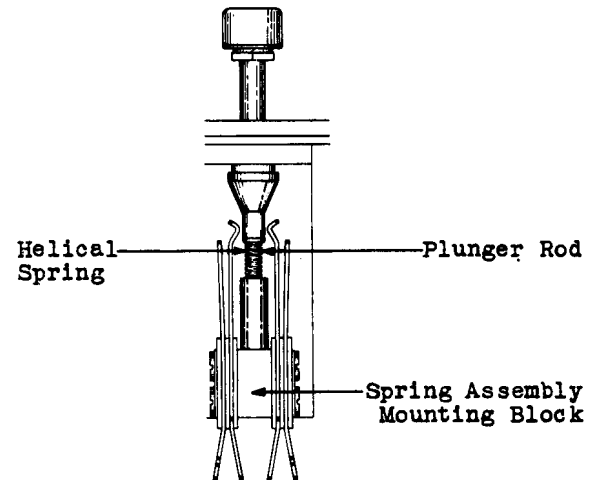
Key Equipped With Spring Assembly Mounting Block
